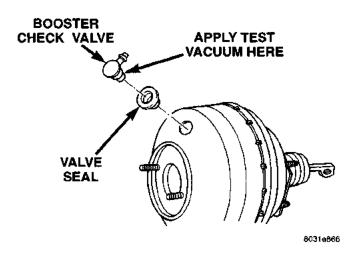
Vacuum Check Valve And Seal COMBINATION VALVE
